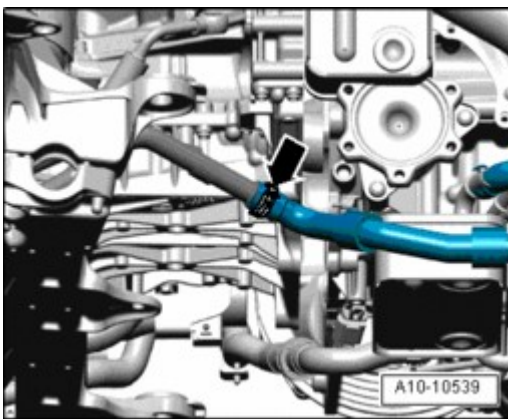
Removing Coolant Hose From Coolant Pipe At Left Of Engine
